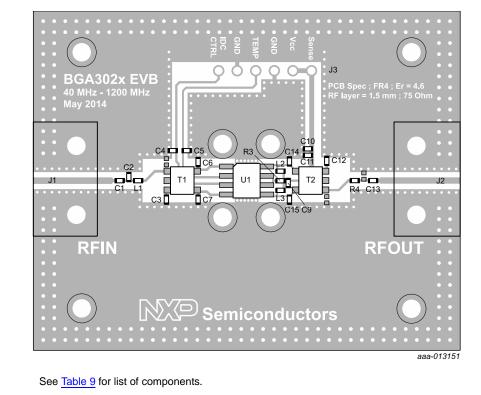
Printed-Circuit Board (PCB) layout MPA only evaluation board
